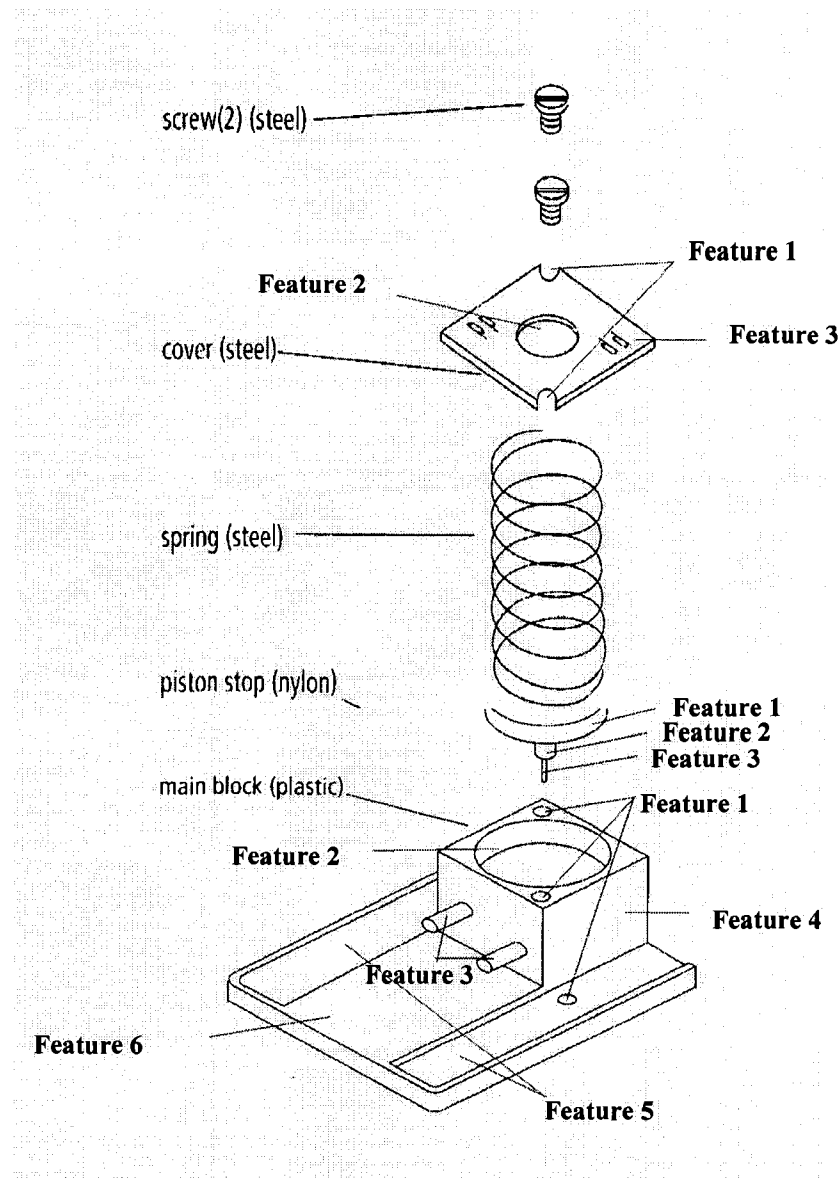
Example 1- Pneumatic piston sub-assembly (Before DFA)
